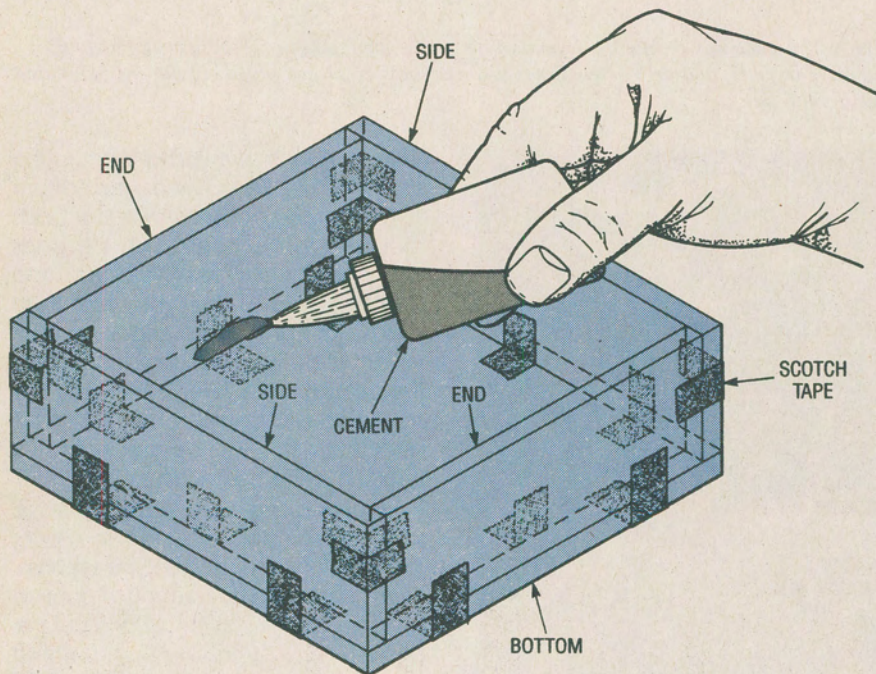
Once you have all the parts cut, tape the sides, ends, and the bottom together, making sure that all the joints are tight and square. Then use liquid-acrylic cement to make the joints permanent.
